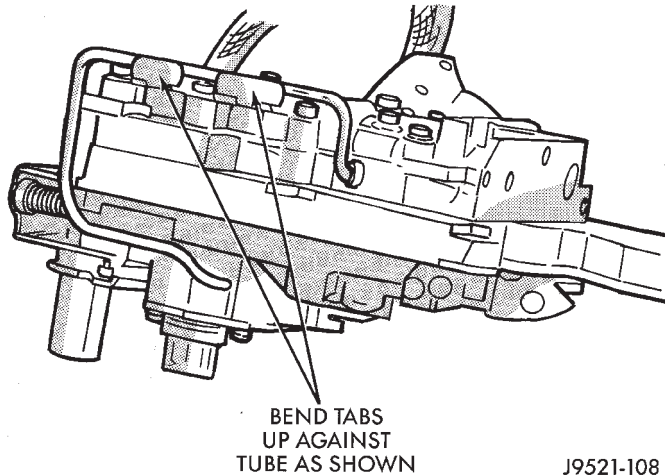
Securing Boost Valve Tube With Brace Tabs
